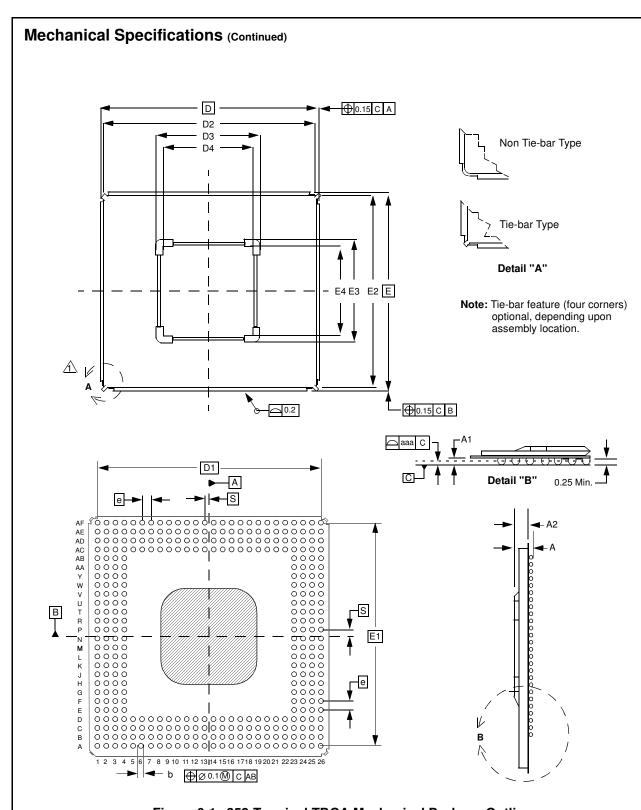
352-Terminal TBGA Mechanical Package Outline
